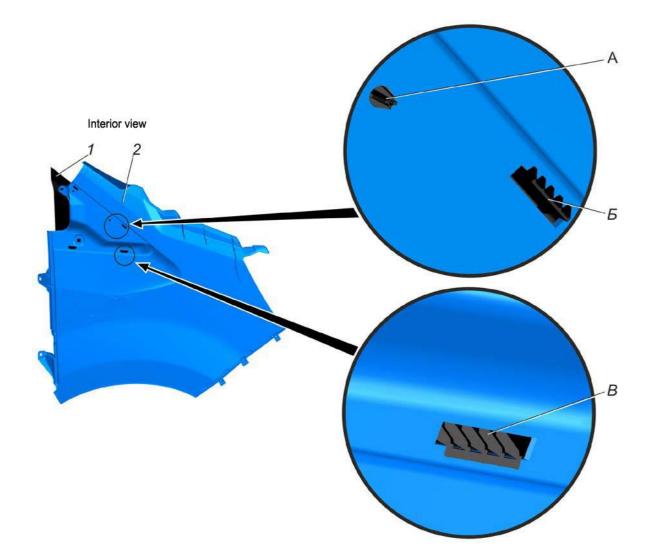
Mirror molding fasteners: 1 - mirror molding; 2 - front fender
